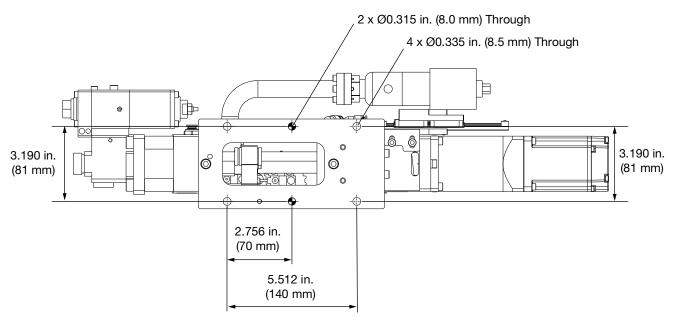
Mounting Hole Dimensions for Installing the PSM Machine - 25cc
